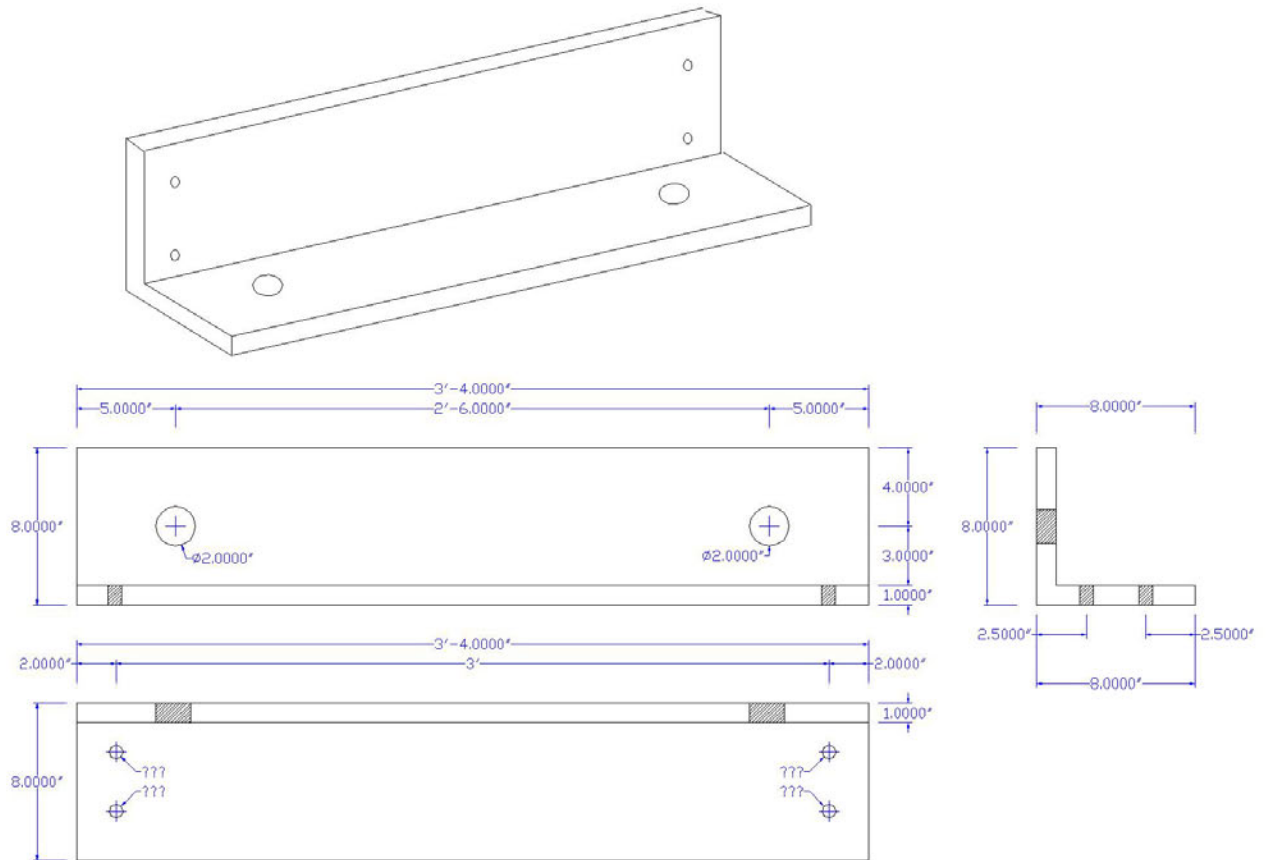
AutoCAD Drawing of Foundation Sides.
